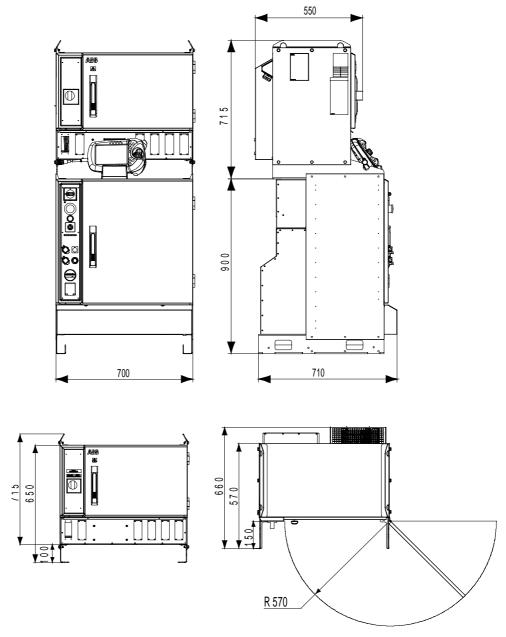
Different views of the Spot Welding cabinet (dimensions in mm).
